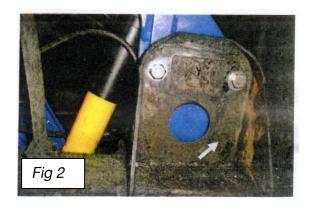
Chassis bracket in position. Note: Indentation in chassis bracket can be seen – arrowed.
